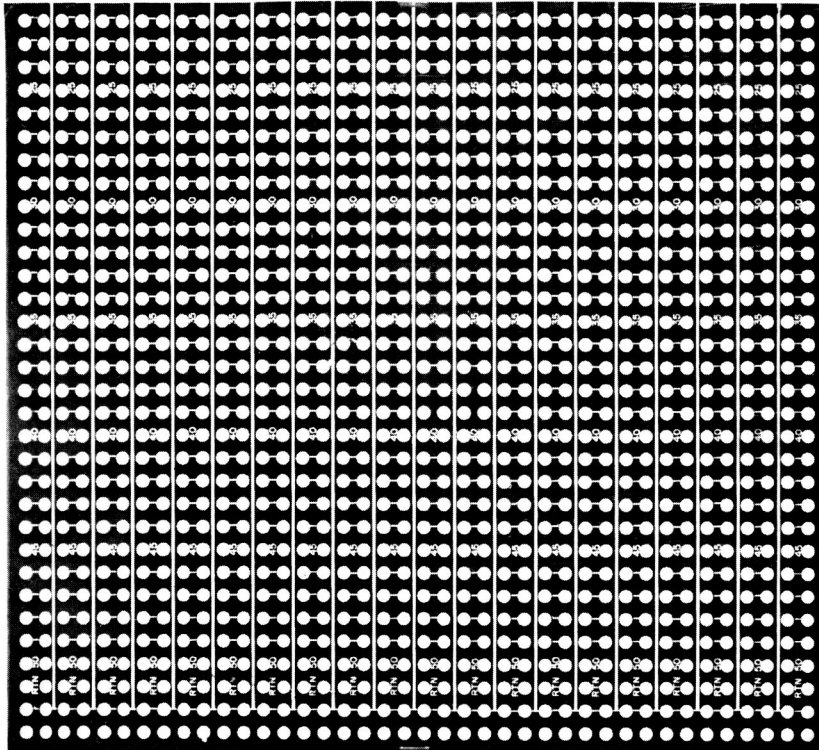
PLUGBOARD, LOWER LEFT PANEL
